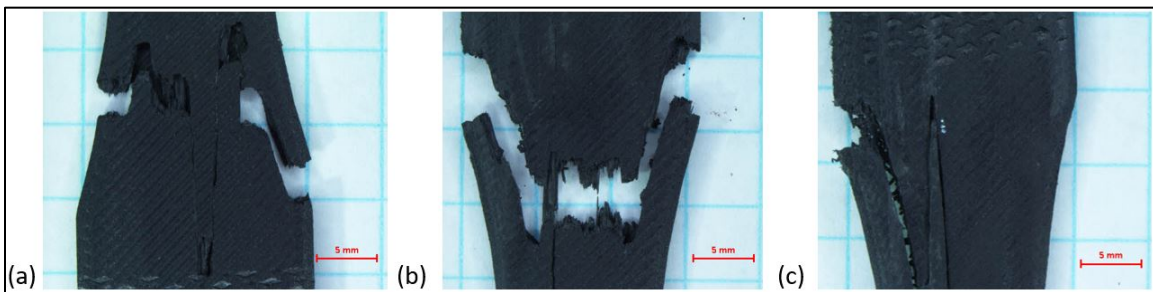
Fractured tensile specimens (a) 2-1, (b) 2-2, and (c) 2-3 printed flat on print bed with Onyx® skin and 100% infill of unidirectional carbon filament oriented in direction of tensile load.
